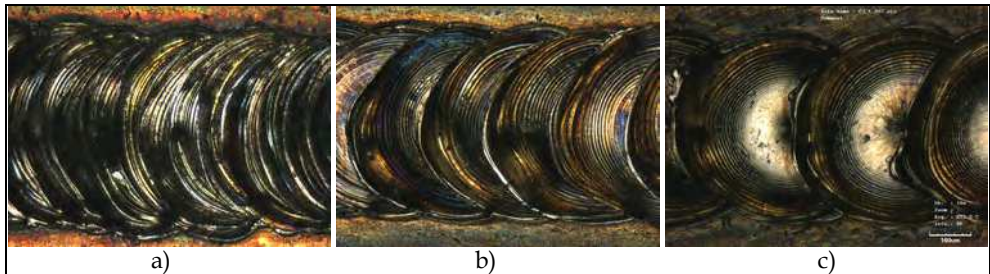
Weld surface in case of welding speed a) $1.5 \text{ mm}\cdot\text{s}^{-1}$, b) $3.5 \text{ mm}\cdot\text{s}^{-1}$ and c) $6 \text{ mm}\cdot\text{s}^{-1}$.
